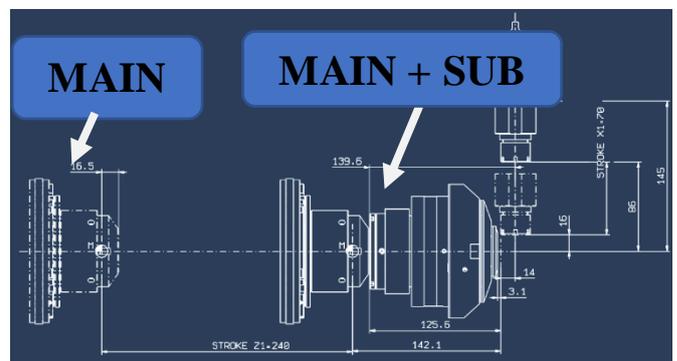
Working space of the DMG Sprint 32/5 linear automat
